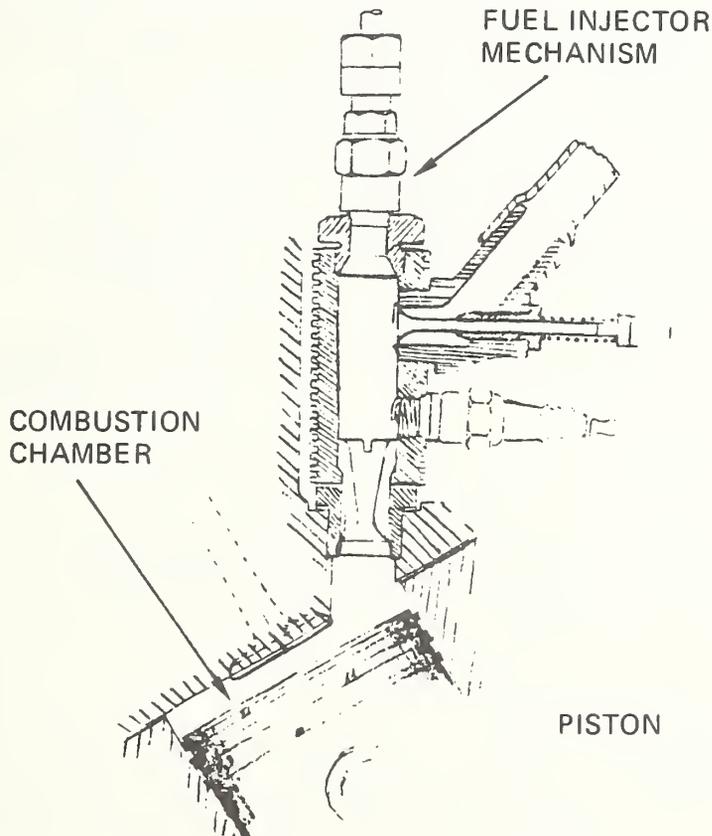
ILLUSTRATION OF FUEL INJECTOR
